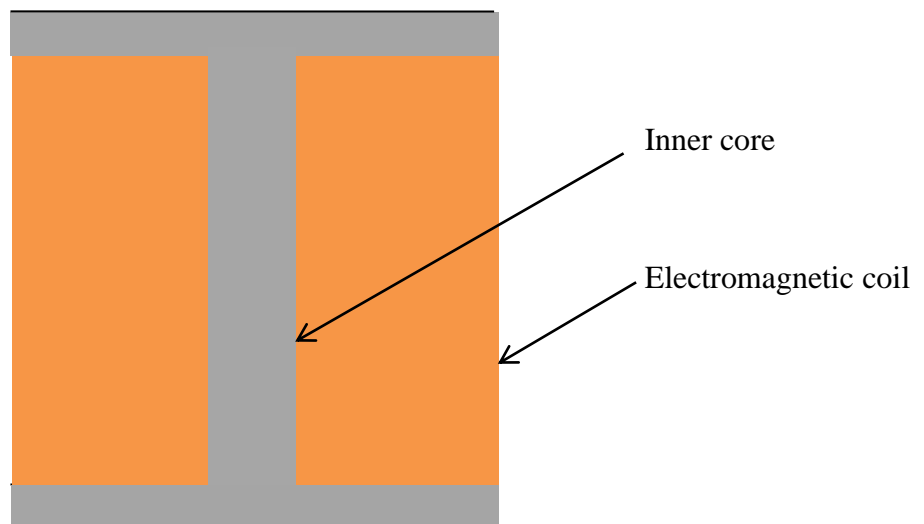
Inner core of MRH tool along with electromagnetic coil
